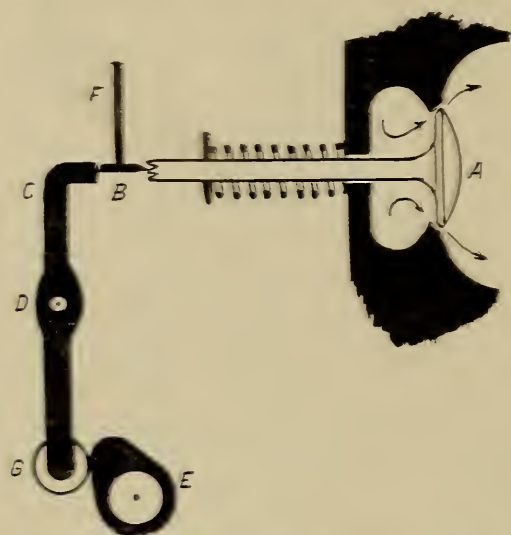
Diagram illustrating “Hit-and-Miss” Mechanism.
